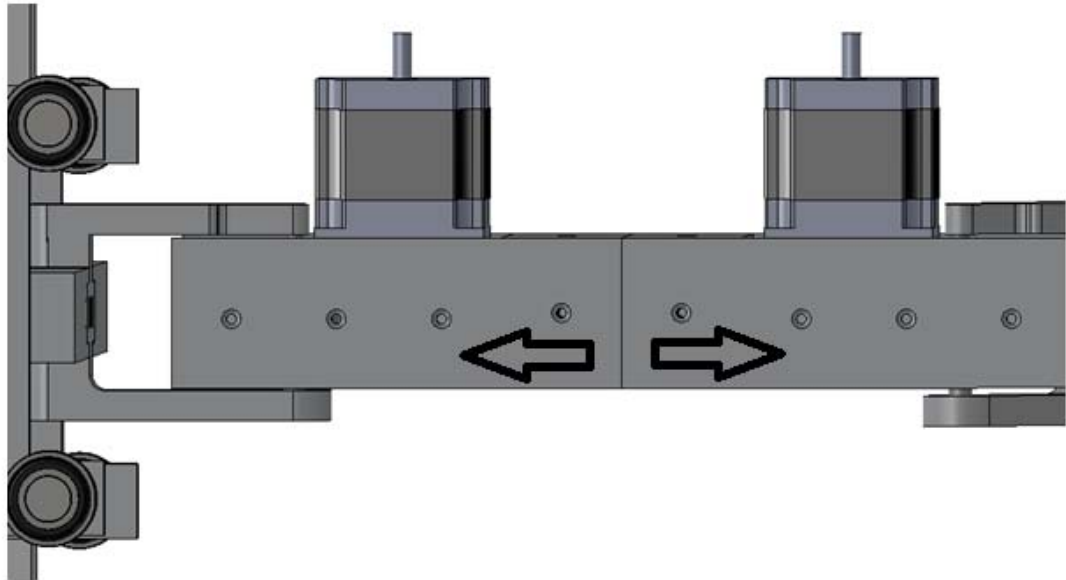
Design 1, showing how the arm was able to extended (or retract) using a sleeve approach.
